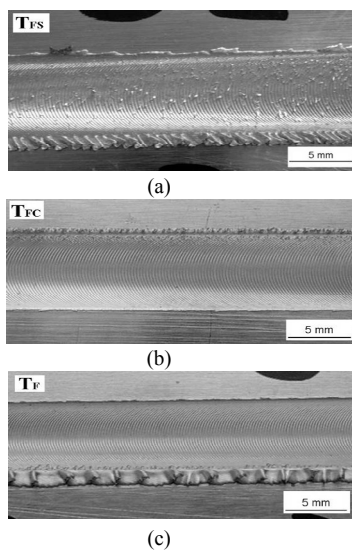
Top weld surface obtained by the studied tools: (a) fillet + scroll tool; (b) fillet + cavity tool; (c) fillet tool.
